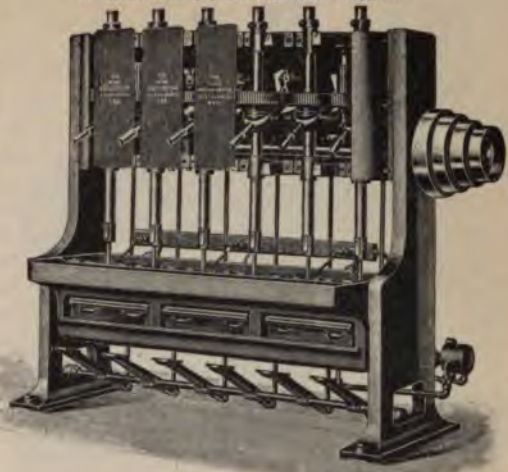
SHOWS SIX SPINDLE MACHINE.
